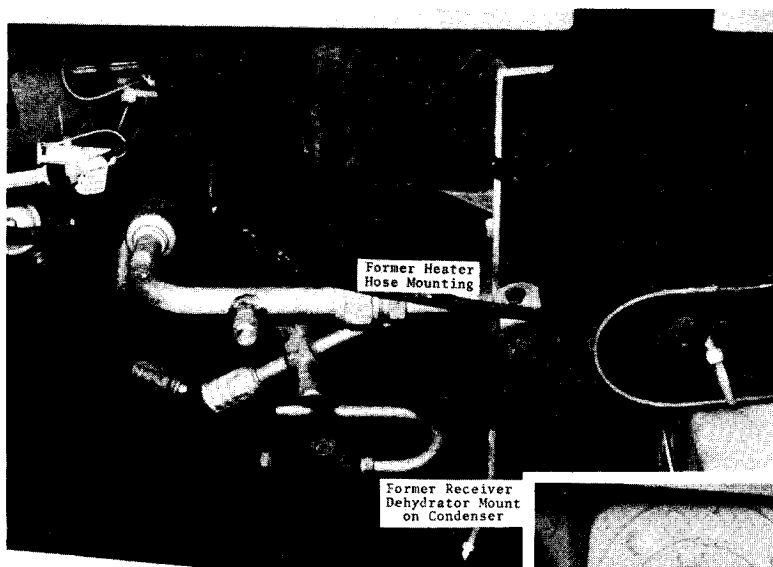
FORMER INSTALLATION OF RECEIVER DEHYDRATOR
